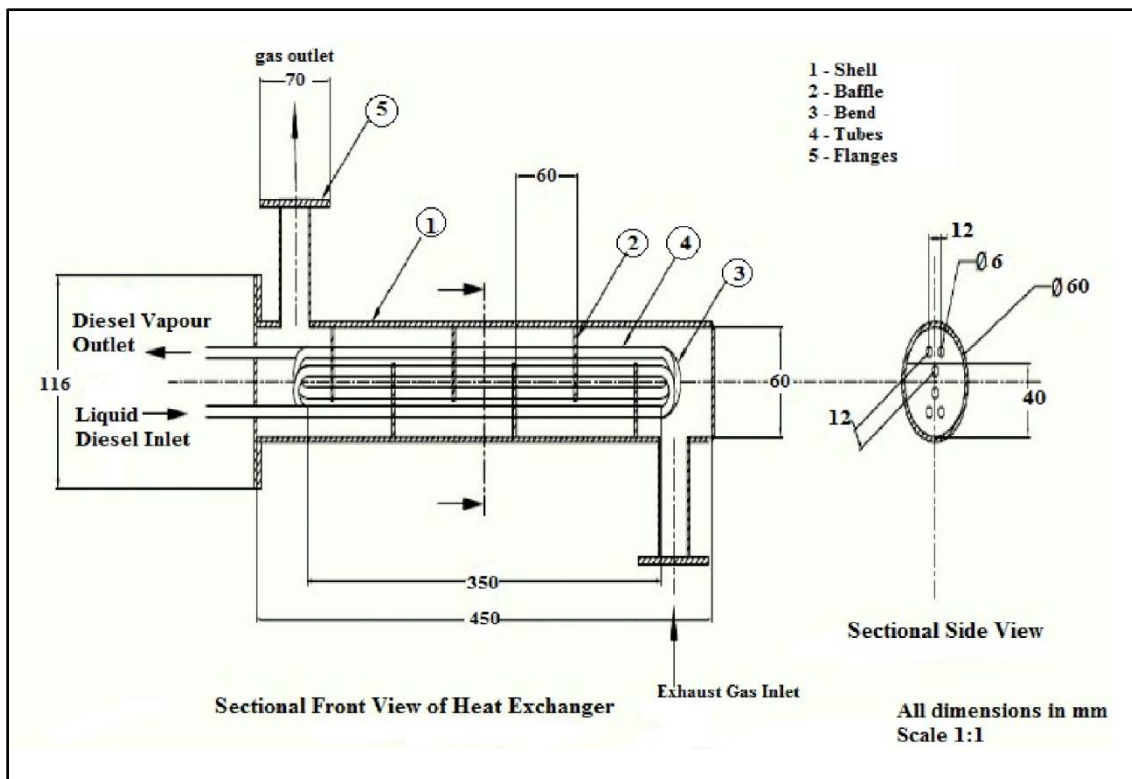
Shell and Tube Heat Exchanger – front and sectional side view
